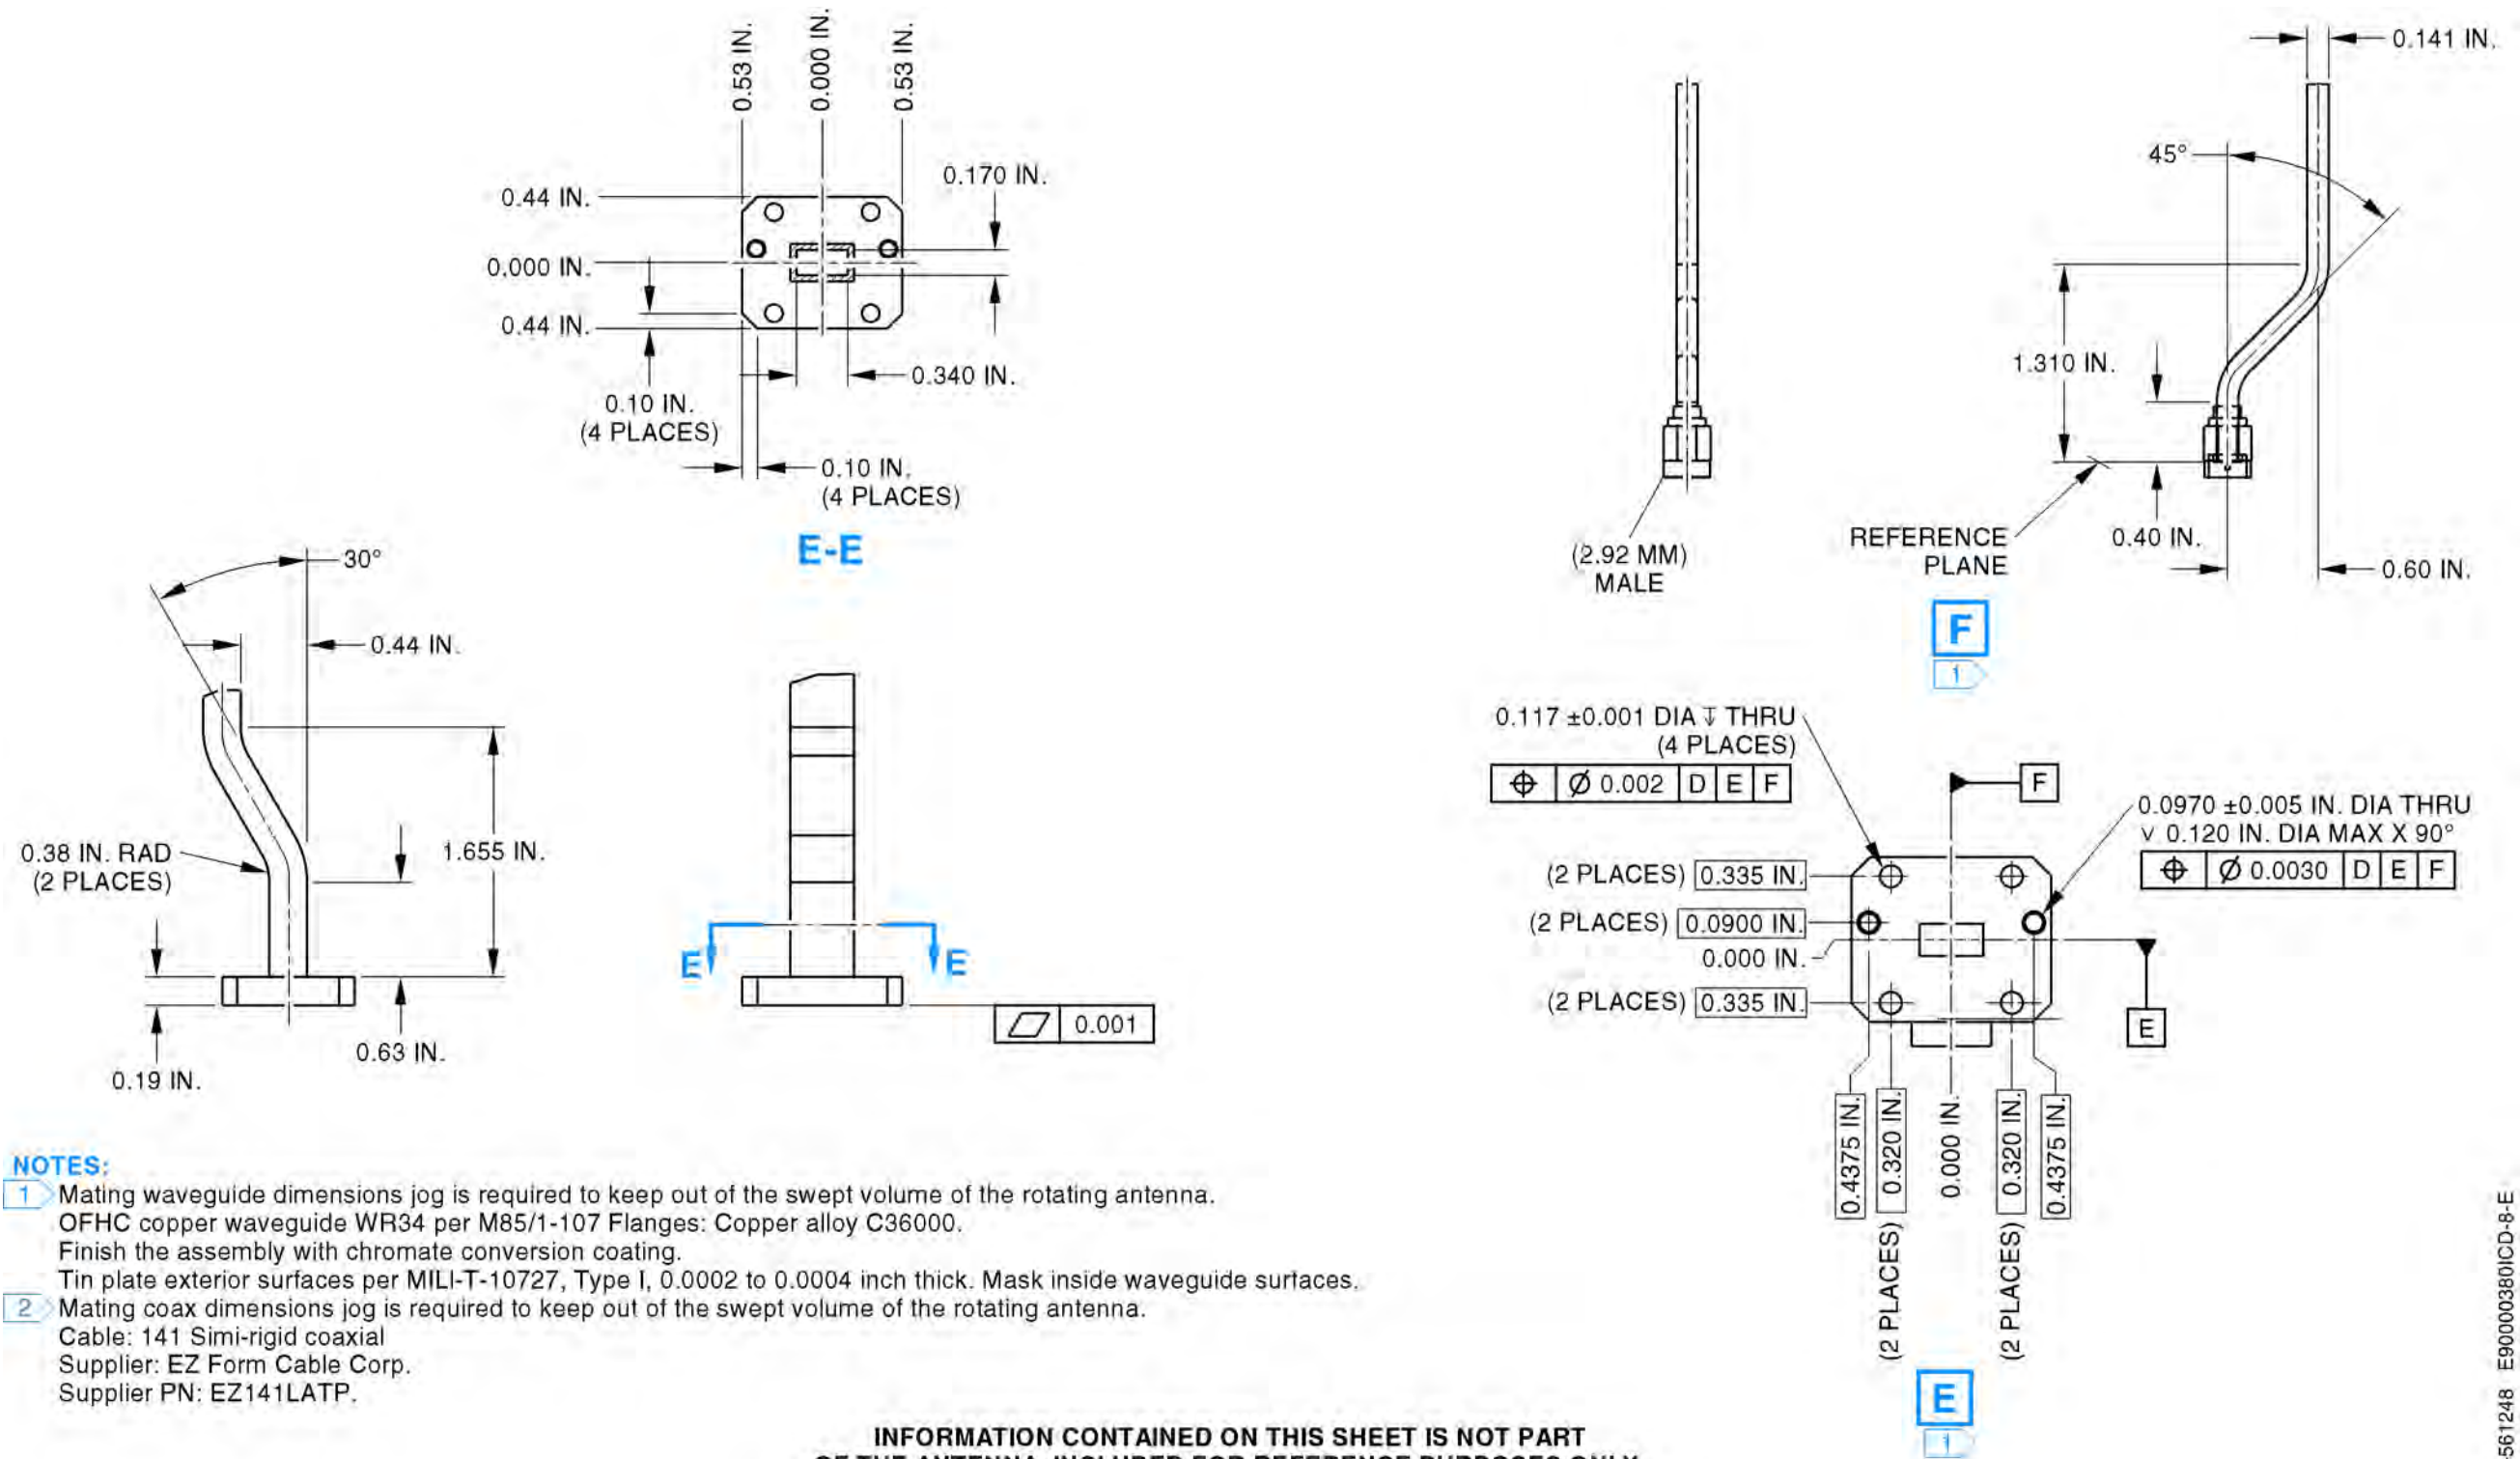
FMA Outline and Installation Drawing (Sheet 8 of 12)
